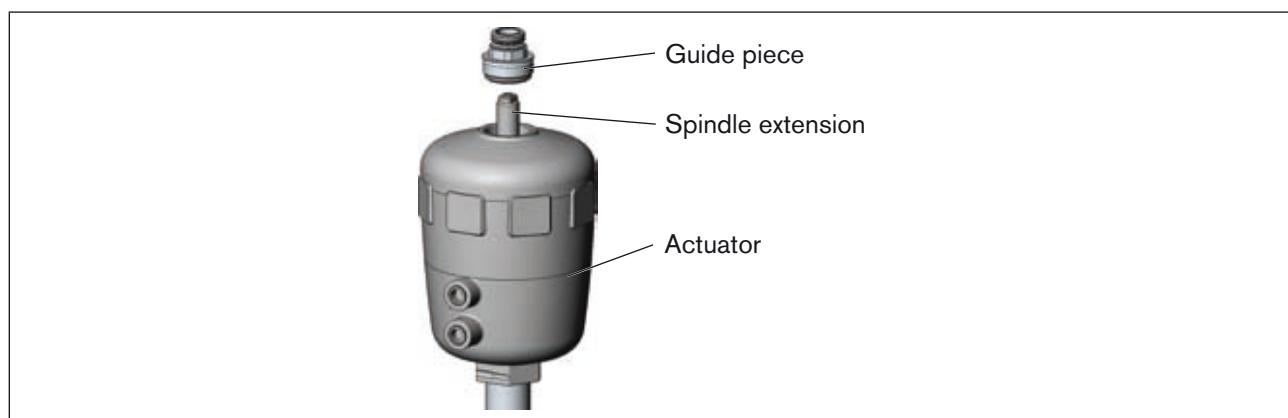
Installing the switch spindle, series 26xx and 27xx-1
